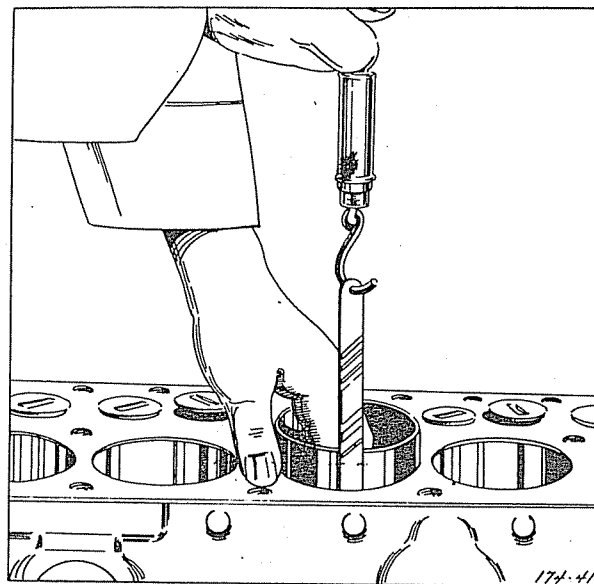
Inserting Piston with Feeler Stock Attached to Spring Scale Tool C-690.
